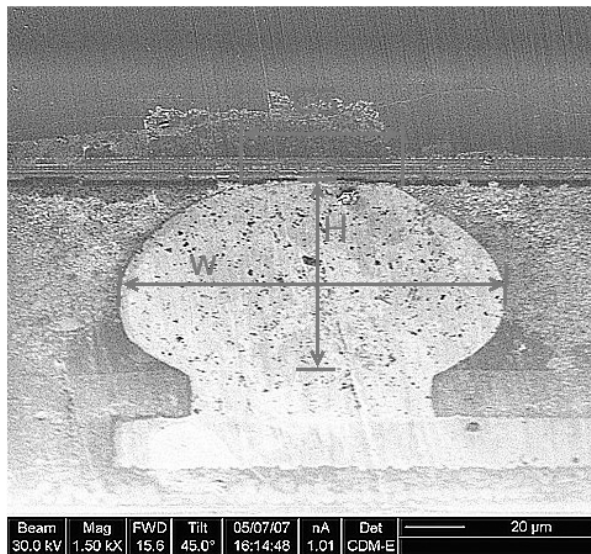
FIB image showing the dimensions of the flip chip solder ball
